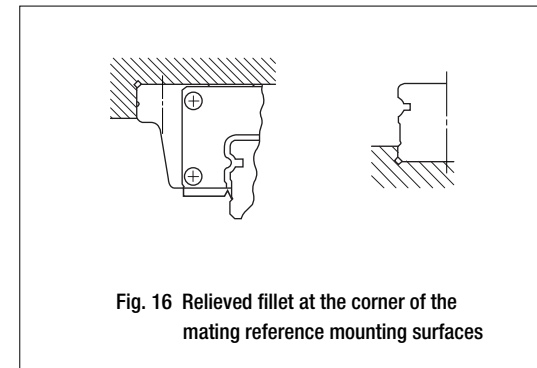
Relieved fillet at the corner of the mating reference mounting surfaces
